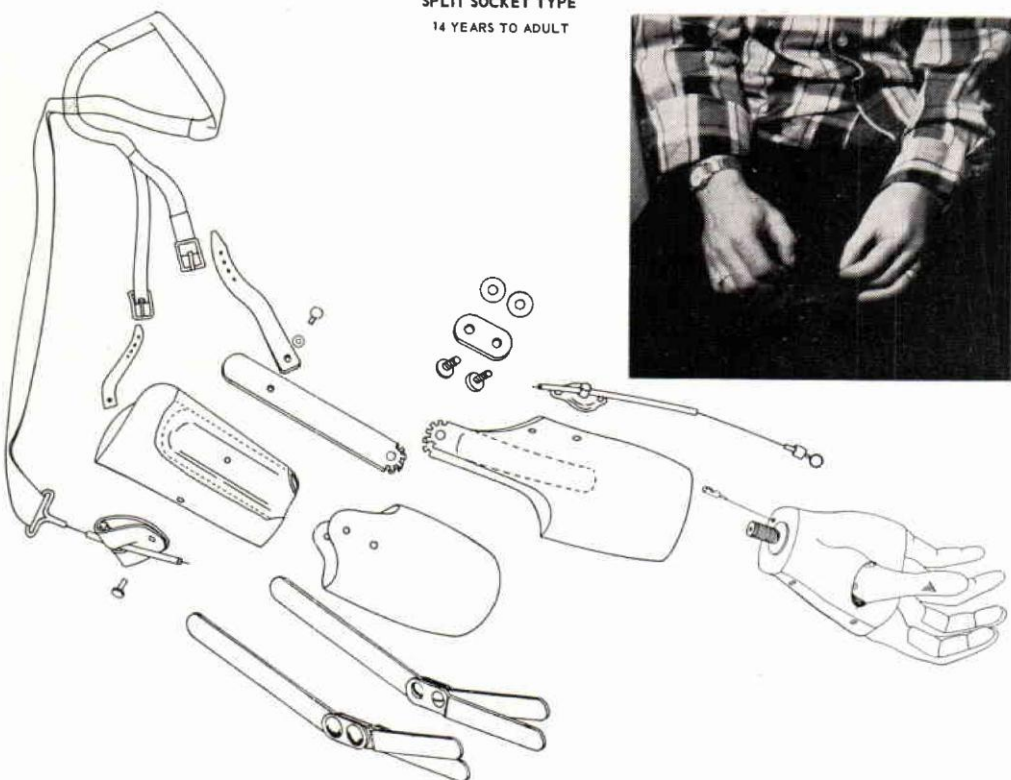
Short below elbow prosthesis, split socket type, 14 years to adult: Figure "8" vinyon harness, single control cable system, half cuff, step-up elbow hinge split socket—plastic, standard forearm sizing, FM wrist disconnect unit, APRL hand and glove. Services: 3 out-patient clinic visits, 3 physician services, 6 parts, 6 hours labor for repairs, including 2 new gloves.
